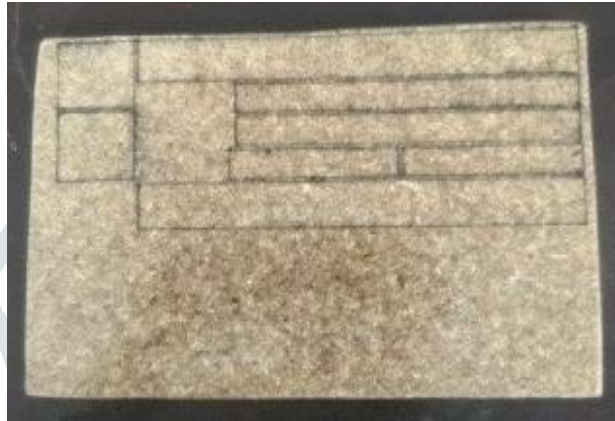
Final composite plate after marking ASTM dimensions for cutting out sample specimen
